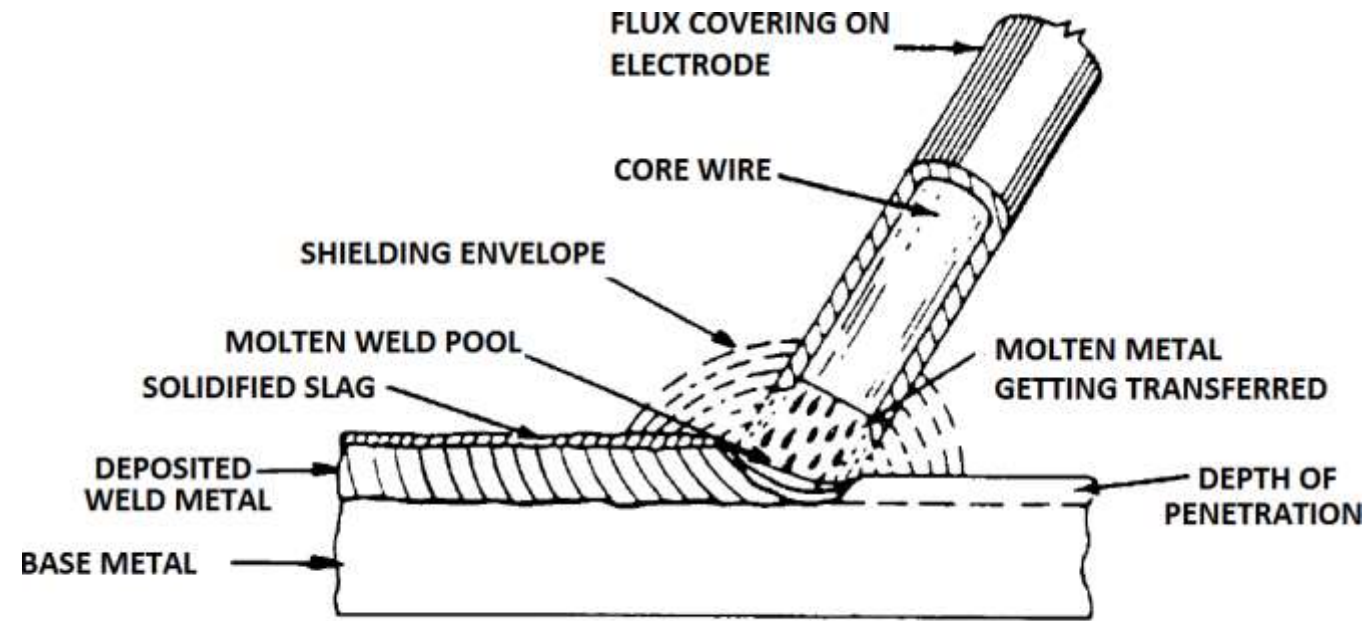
SHIELDED METAL ARC WELDING (SMAW)
